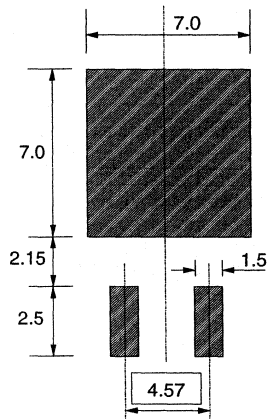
SOT428 : minimum pad sizes for surface mounting.
